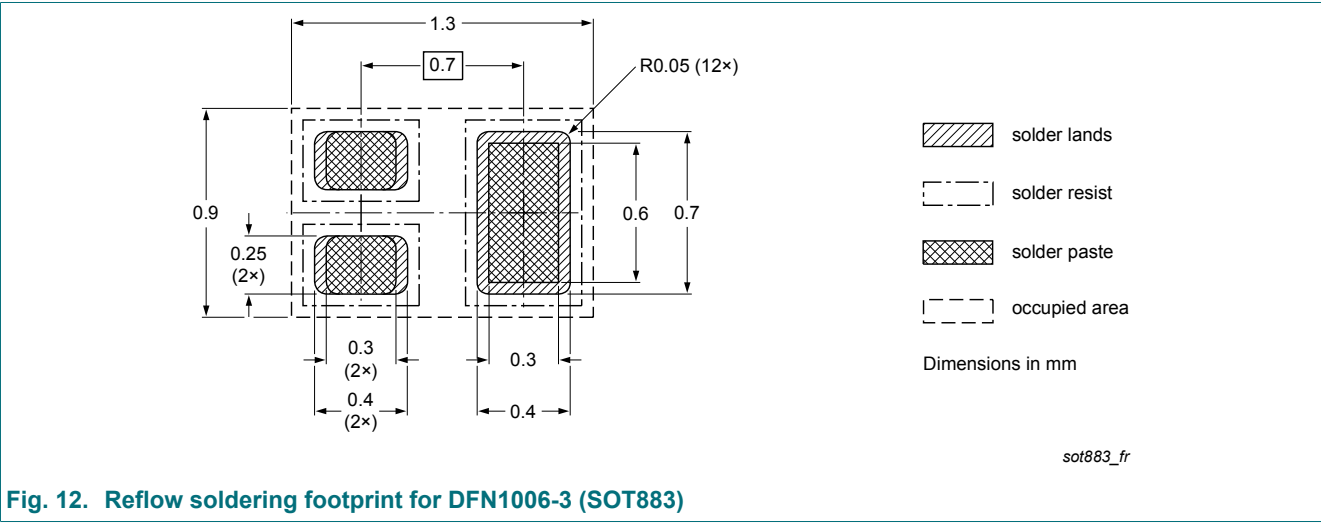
Reflow soldering footprint for DFN1006-3 (SOT883)
